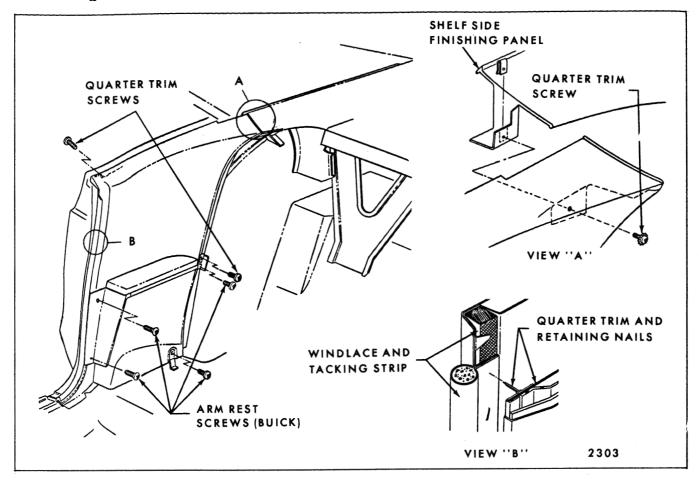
Rear Quarter Arm Rest and Trim Assembly - "E" Body
